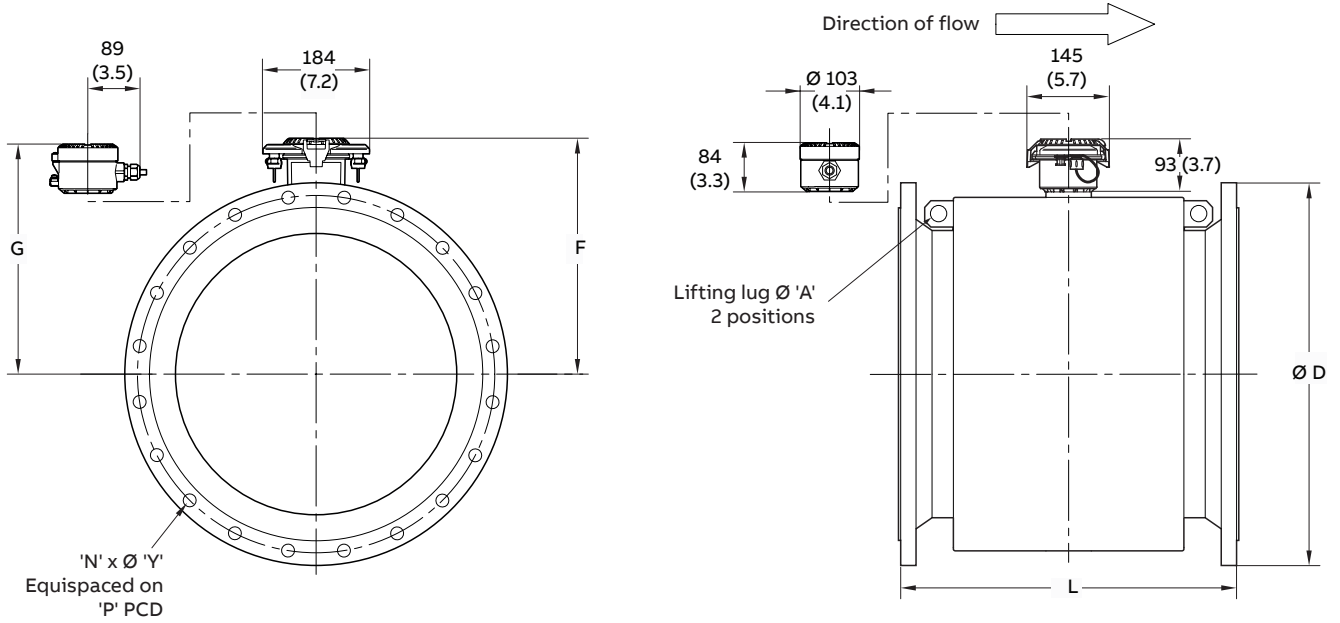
F-style sensor – DN700 to 2400 (28 to 96 in.)
